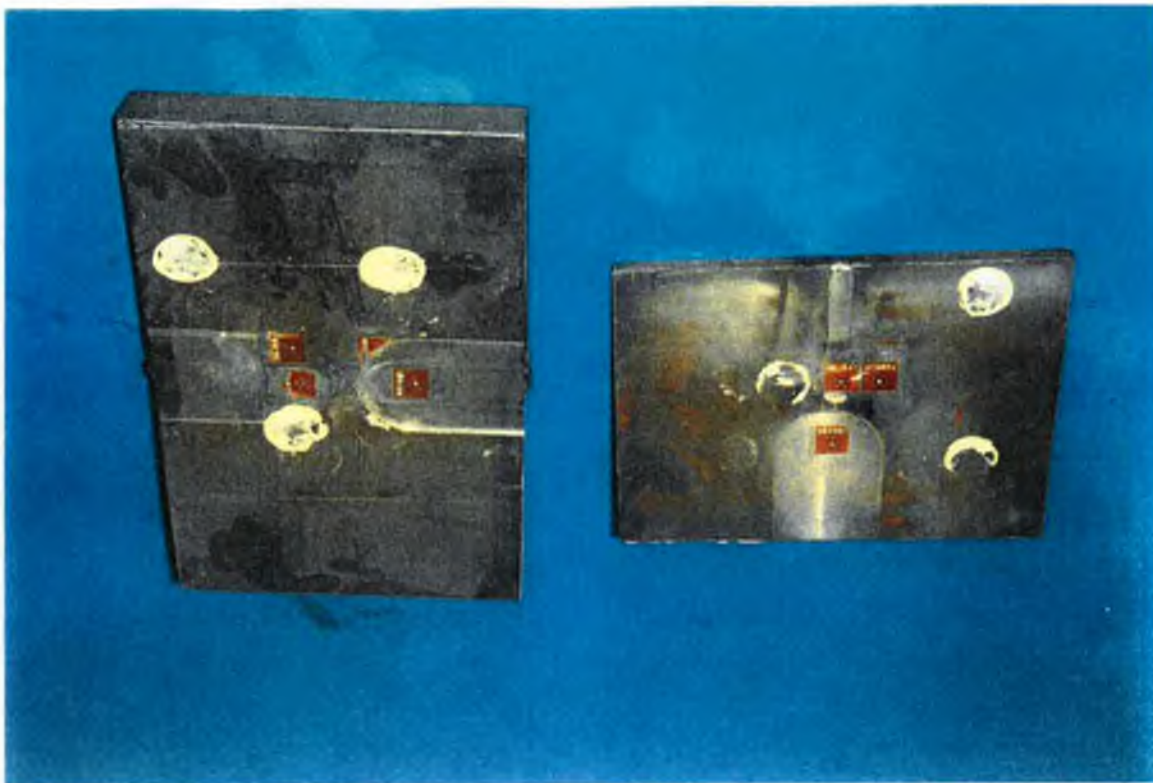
THE WELDING SPECIMEN AFTER MACHINING THE WELDING ZONE TO MEASURE THE RESIDUAL STRESSES.
